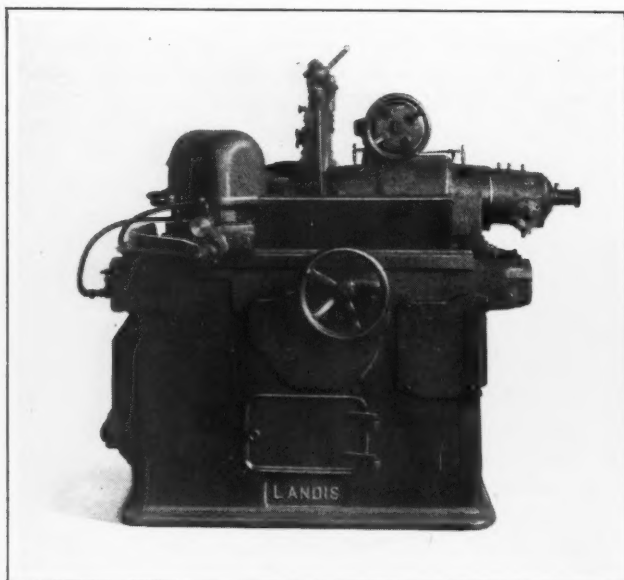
Landis Semi-automatic Hydraulic Valve Face Grinder
